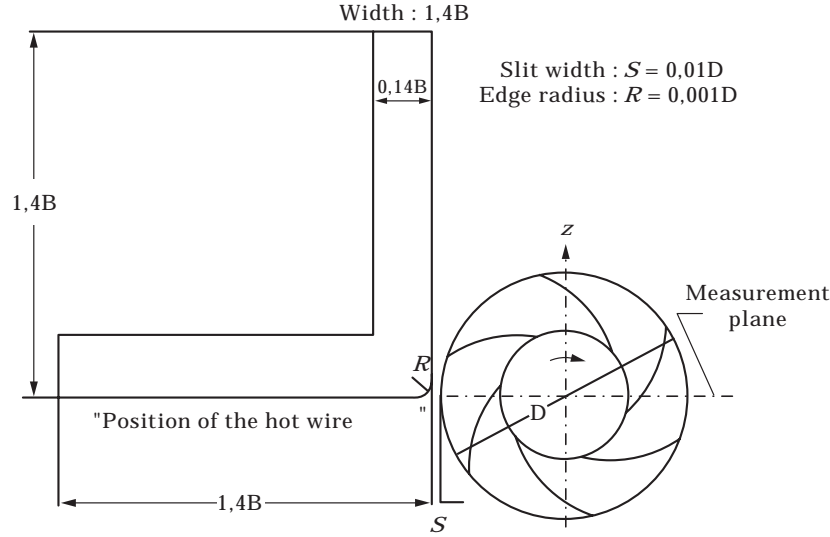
Dimensions of the impeller and wedge used by Weidemann.
